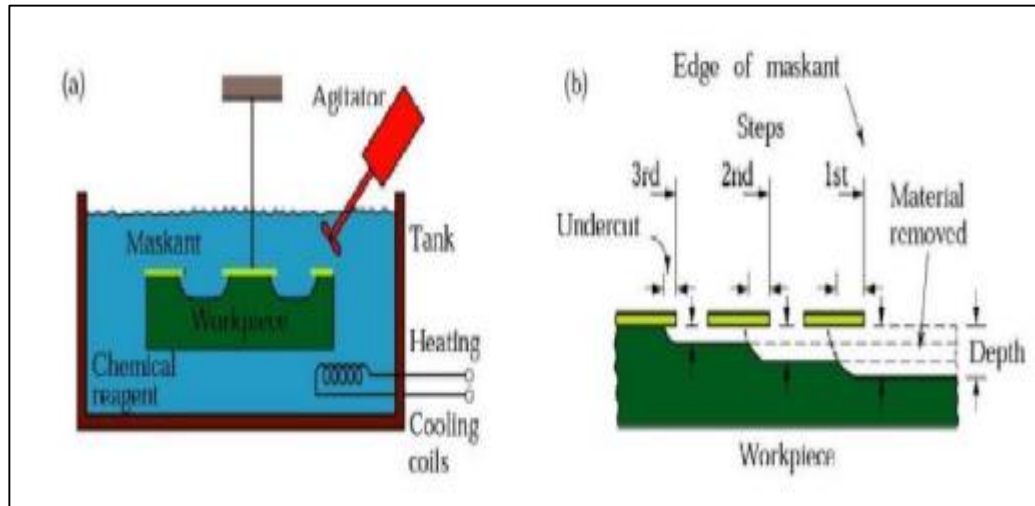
(a) Schematic diagram of chemical machining (b) Stages to produce profiled Cavity through chemical machining [72].
